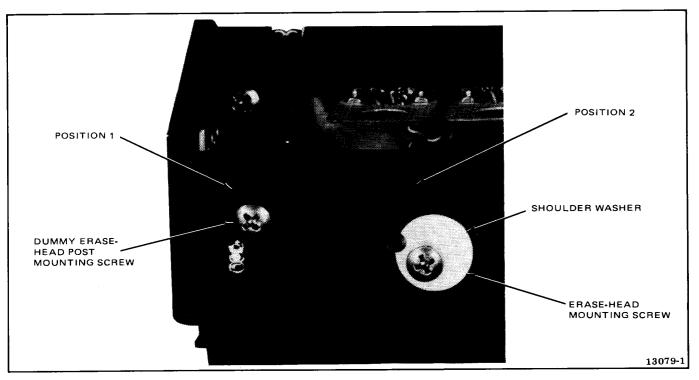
Erase-Head Mounting Position 2 (After Modification)
